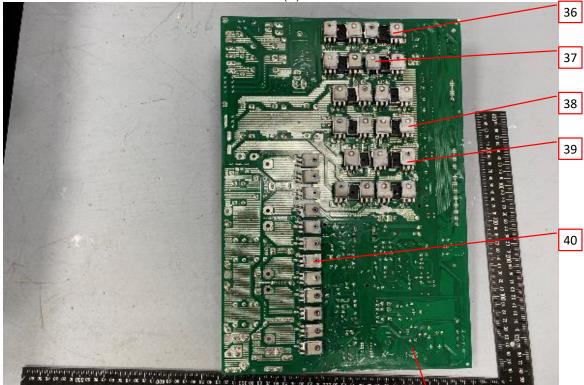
PCB Trace Side View - 16-501752-00G(C)
